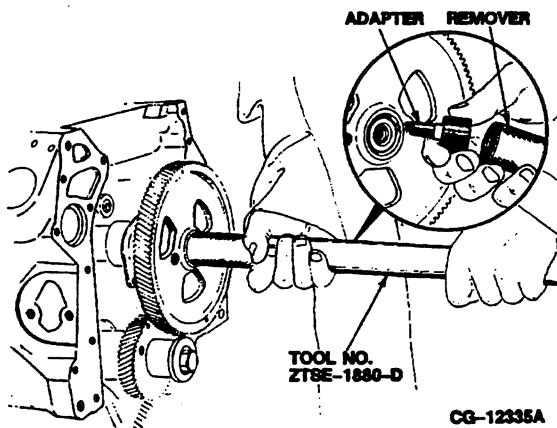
Removing Camshaft Thrust Bolts
